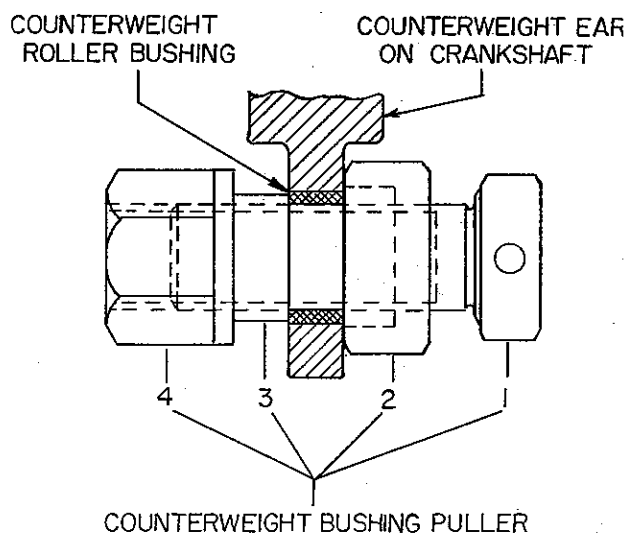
Removal of Crankshaft Counterweight Bushing
